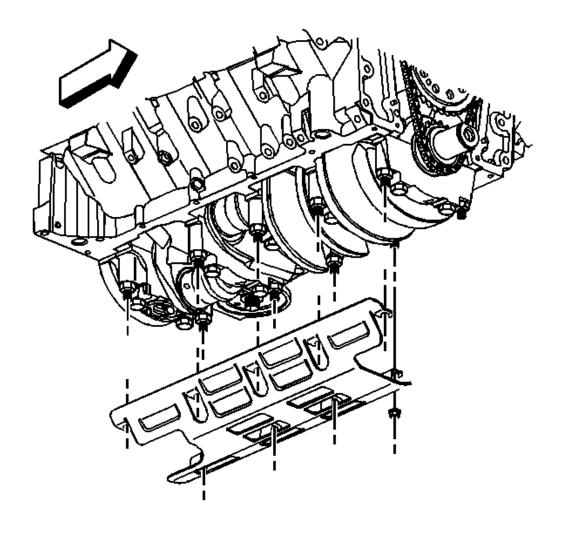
View Of Crankshaft Oil Deflector & Nuts Courtesy of GENERAL MOTORS CORP.
